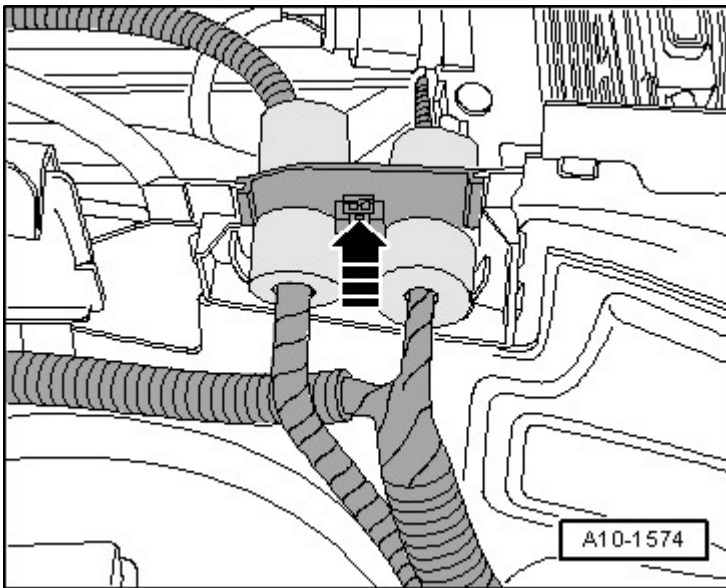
Disconnecting Engine Wiring Harness Electrical Connector
